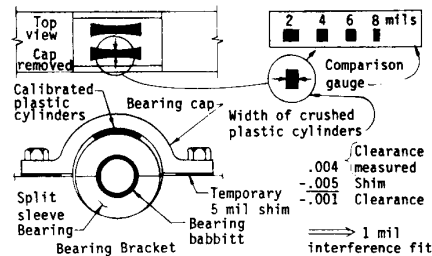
Technique for measurement of bearing-to-bearing housing fits.
